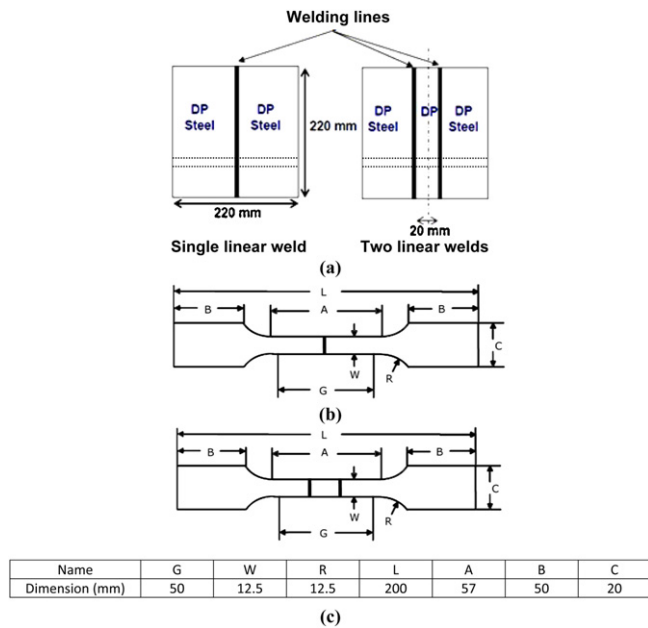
Geometry and dimensions of work pieces and test specimens, (a) work pieces to be welded, (b) tensile and fatigue test samples cut from the single linear weld indicated by the dashed lines at the left side of (a), (c) tensile and fatigue test samples cut from the multiple linear weld indicated by the dashed lines at the right side of (a).
